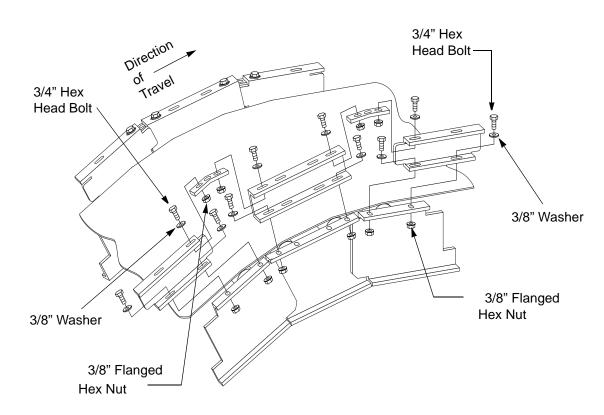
Upper Bend Unit with Channel Side Guides, Direct Mounting
